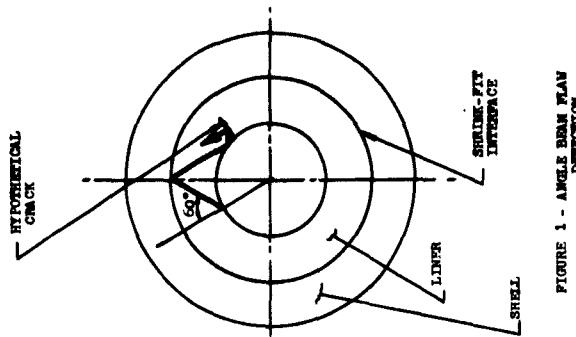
ANGLE BEAM PLAN DEFLECTION
